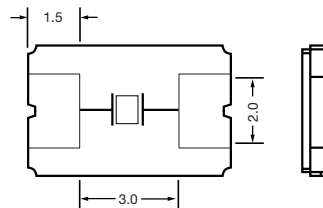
ECX-64AEN - Pad Configuration Bottom and End views
